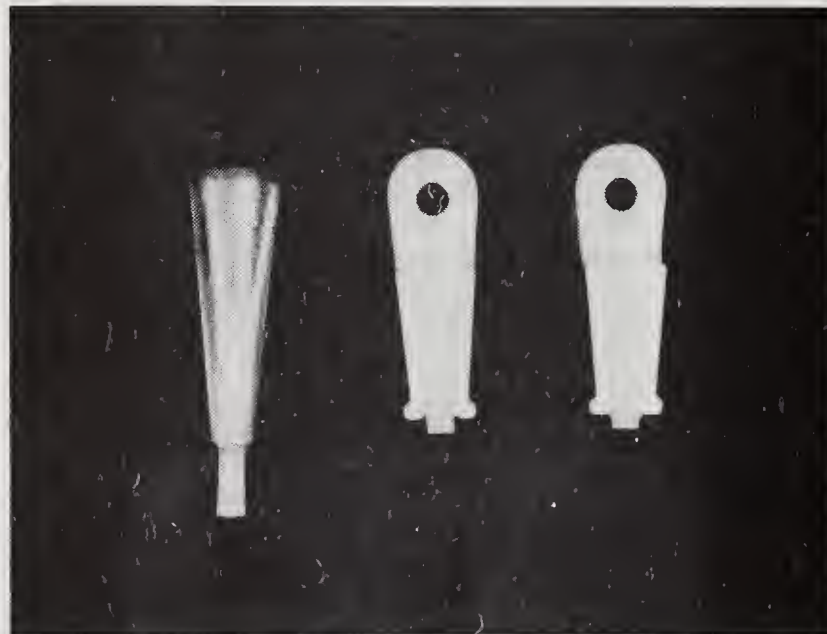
Left: Potted cone containing a wedged rod, removed from a compression end fitting. Center and right: Sectioned aluminum end fitting. Note the two small holes drilled into the rod in the center view.
